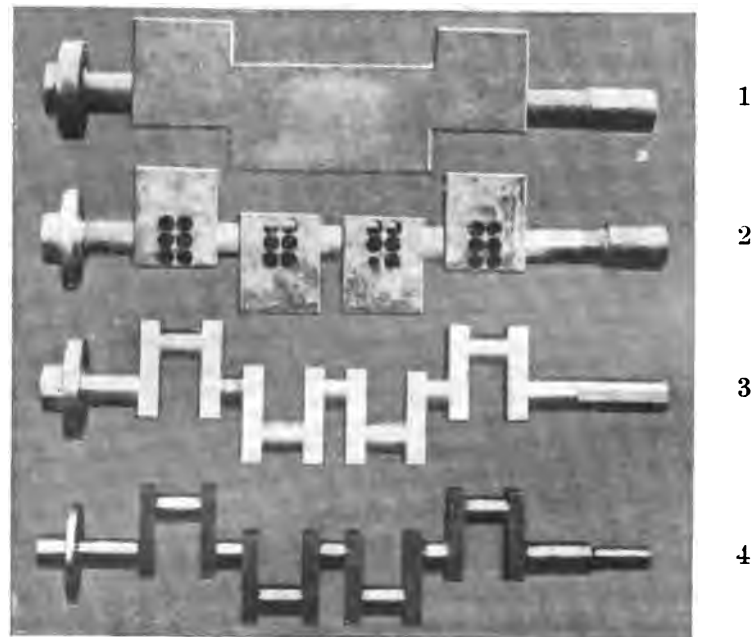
Four stages in the manufacture of a petrol motor crank shaft.
